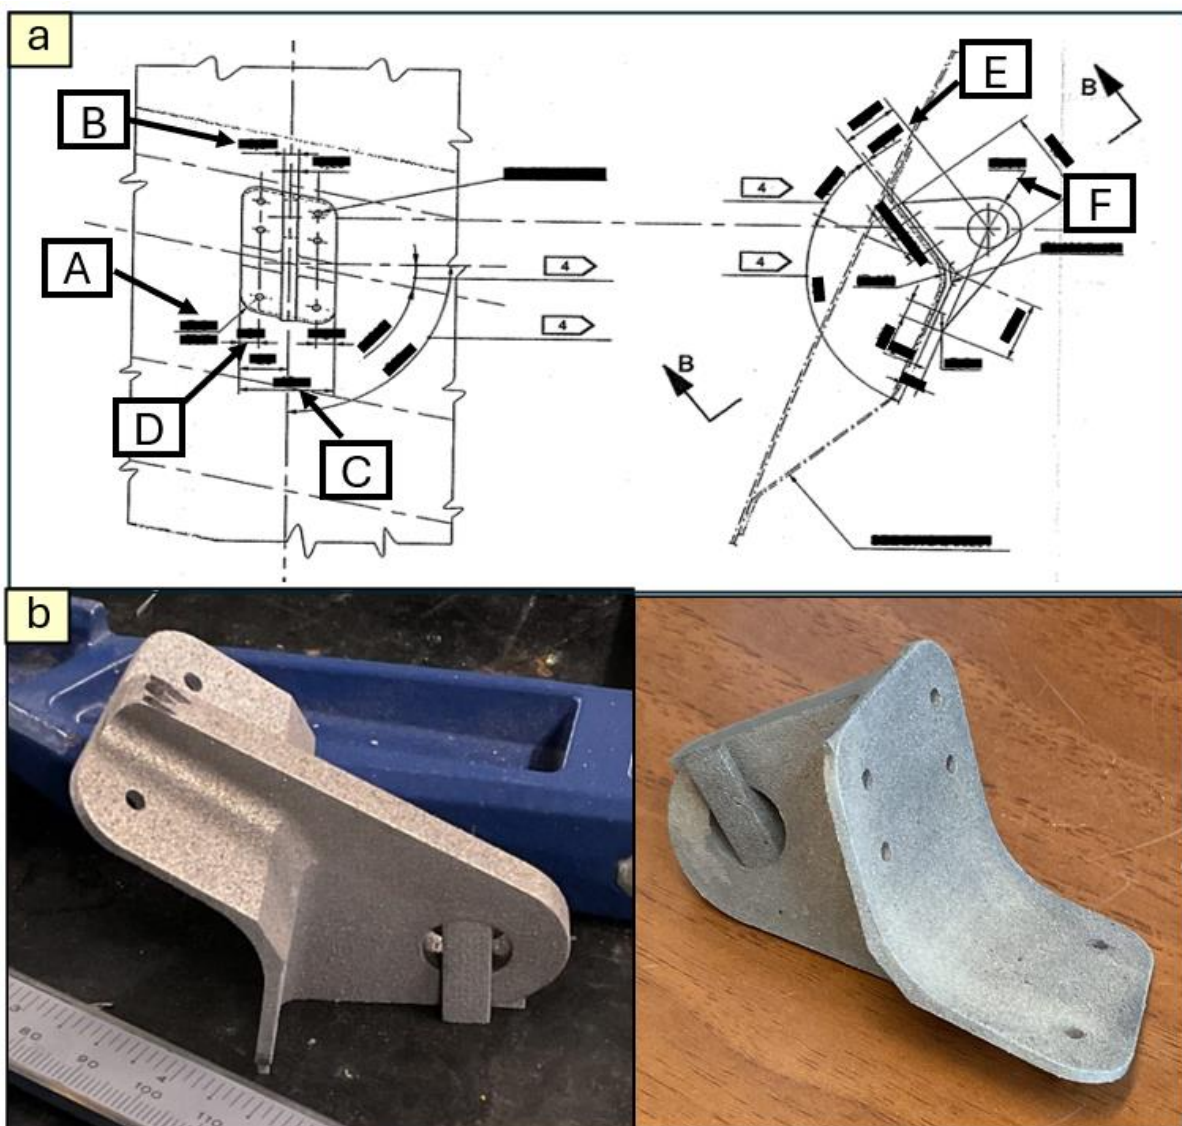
(a) Technical drawing dimensions (© Leonardo S.p.A.) (b) Bracket prospective.
